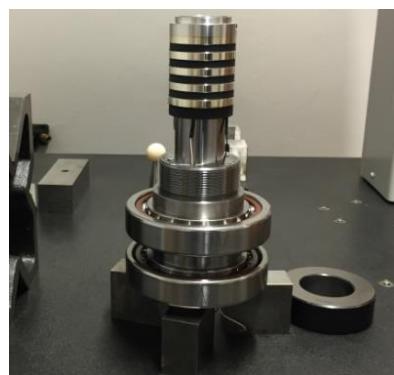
Slipping assemblies for temperature measurement of spindle bearing inner rings
